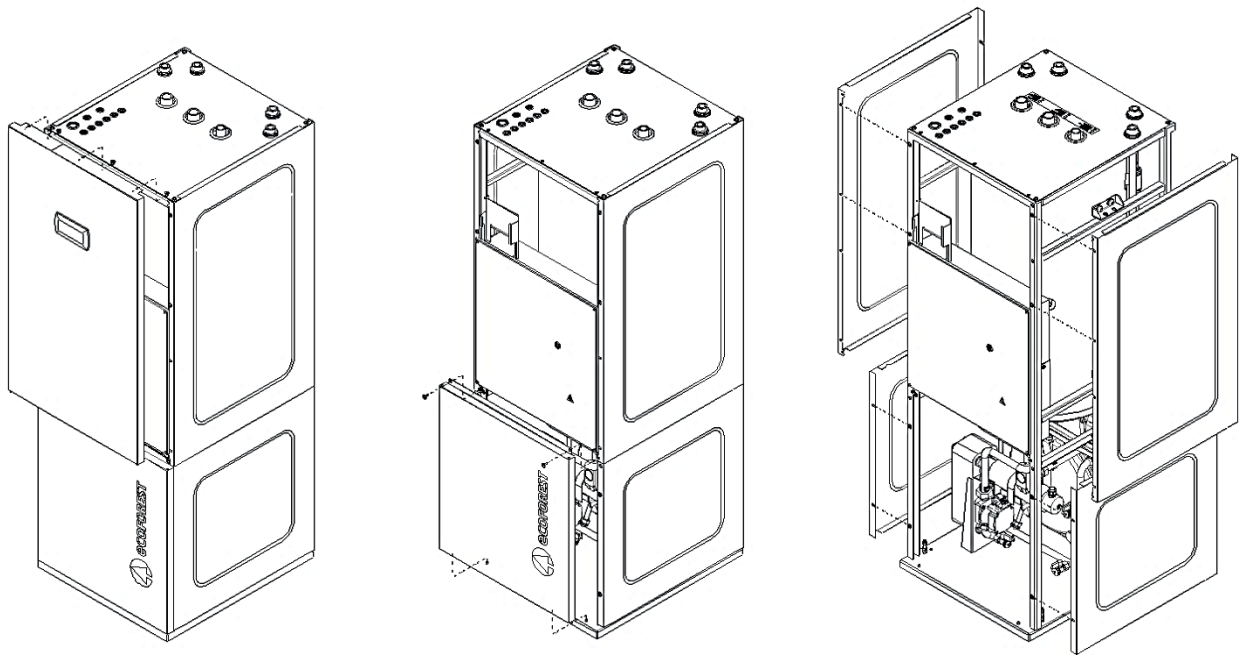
Disassembly of the cover of Hidrokit Compact indoor units.
